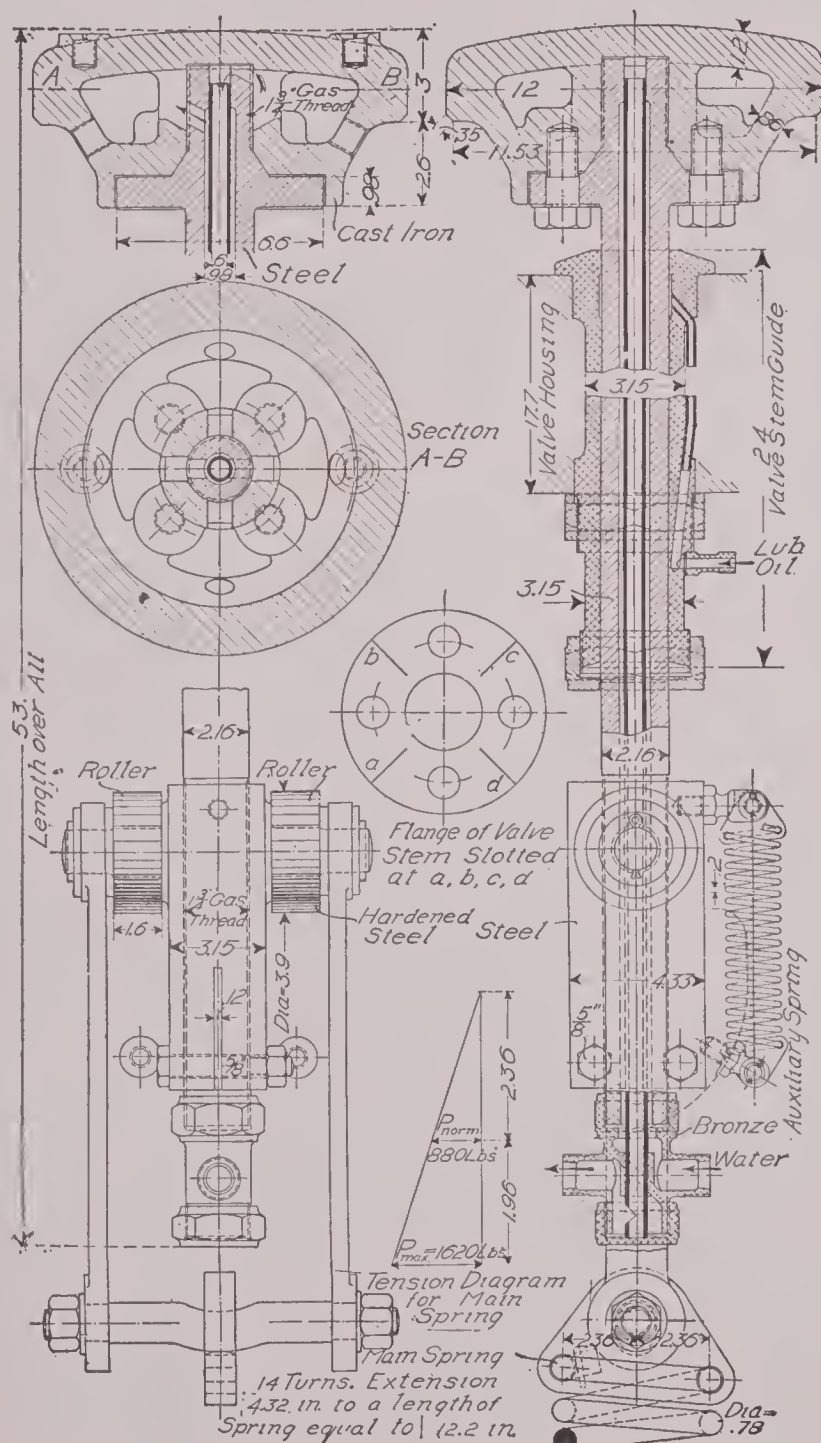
Water-cooled and balanced Exhaust Valve for a large Crossley Engine.
